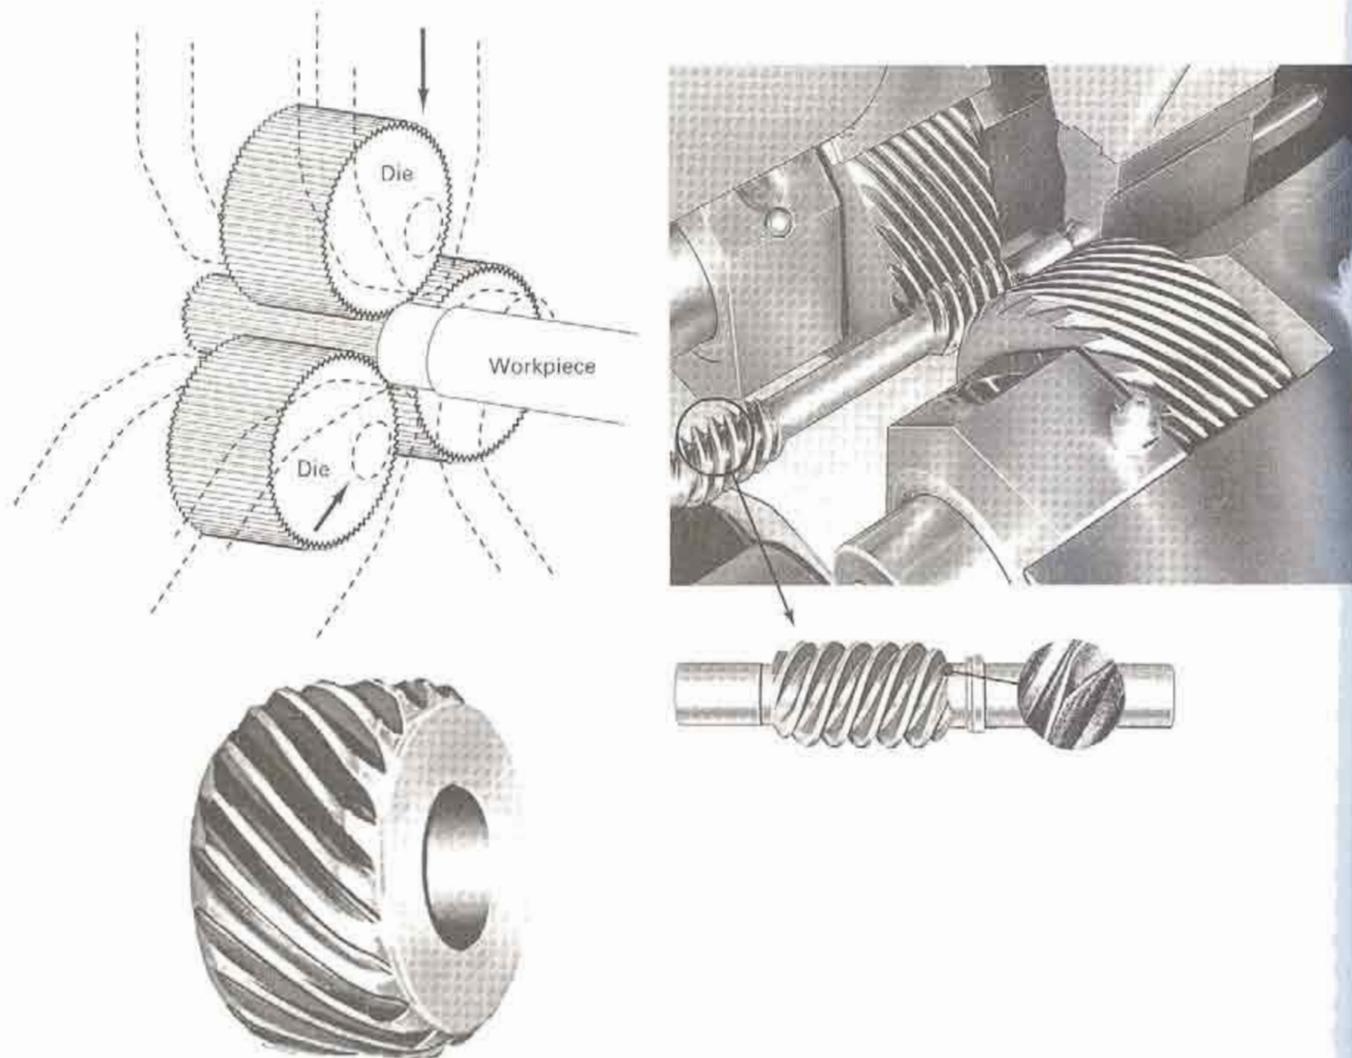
On the upper left, the method for cold forming gear teeth on a spline using three dies is shown. (Upper right) Worm gear being roll formed by means of two rotating rolling tools with typical worm made by rolling. (Lower left) Gear made by rolling. (Courtesy of Landis Machine Company.)
